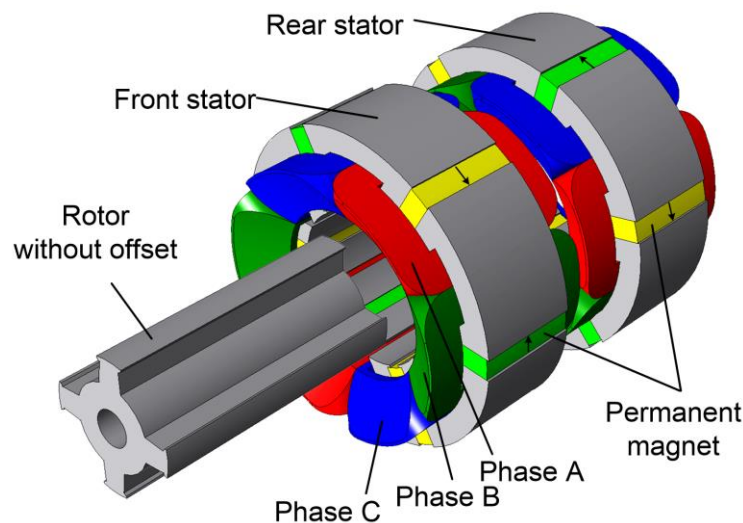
Exploded view of proposed Topology-III of the dual-stator 6/4 FSPM machine.
